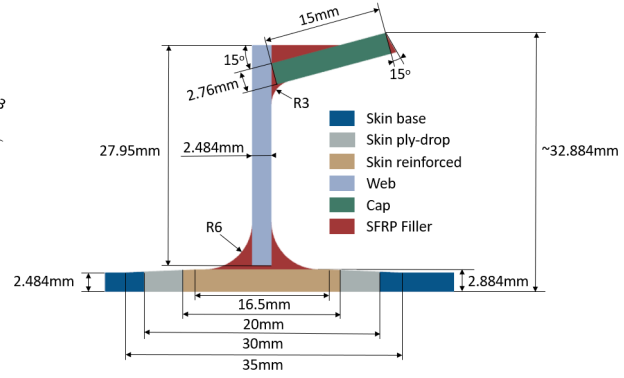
3-stringer panel's stringer geometry and material sections
